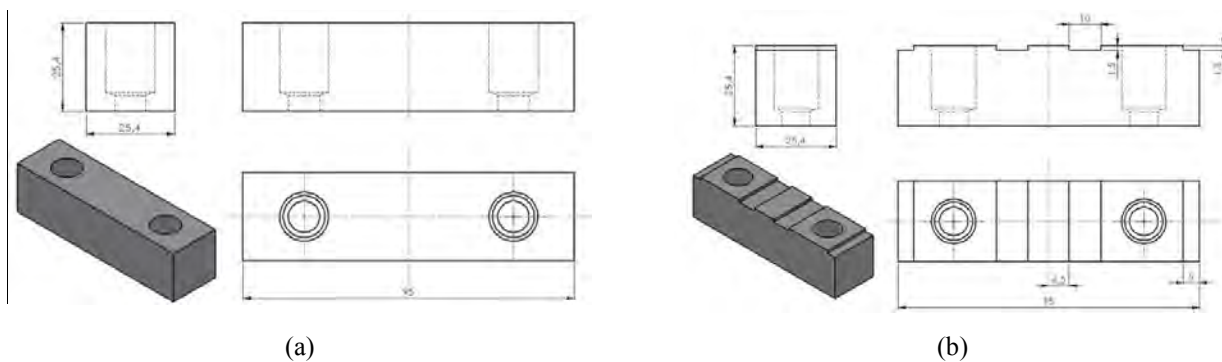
Standard drawings: (a) workpiece; (b) machined part
